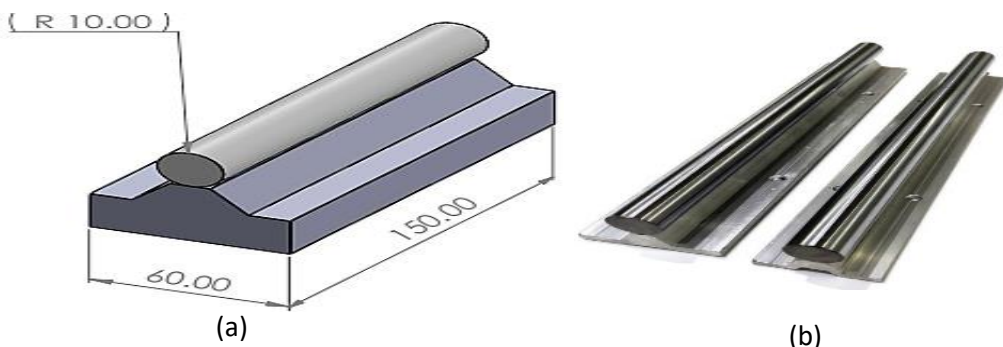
a) Sketch of a linear shaft in SOLIDWORKS program b) Duplicated picture for the linear shaft part
